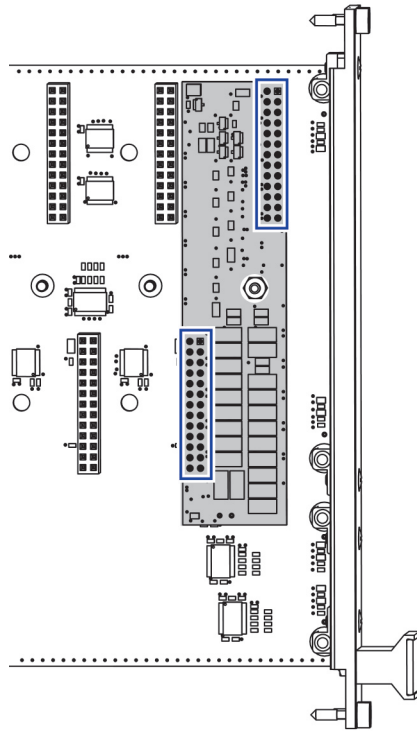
Front View of an Assembled PB5385RES.1-A Resistor Cascade Piggyback
